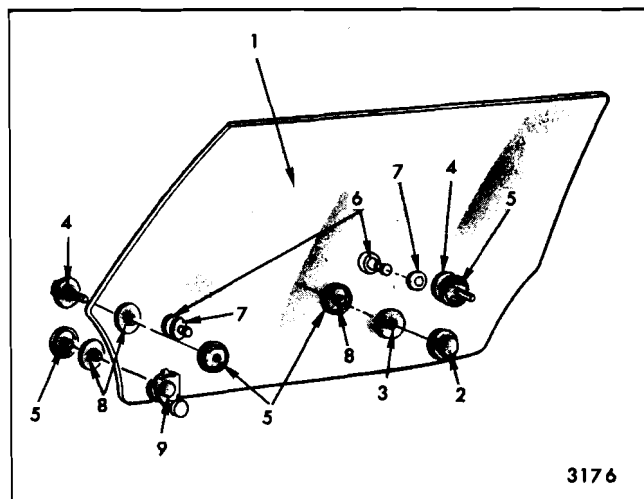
Front Door Window Assembly - "B-39" and "C-39, 49 and 69" Styles
